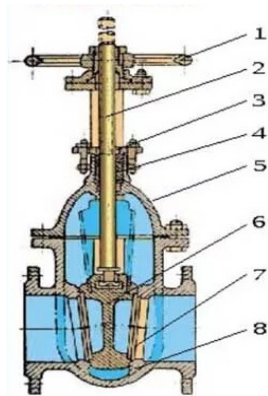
Wedge gate valve: 1 – flywheel, 2 – spindle, 3 – pressure sleeve, 4 – oil seal, 5 – valve cover, 6 – wedge, 7 – seat, 8 – housing.
